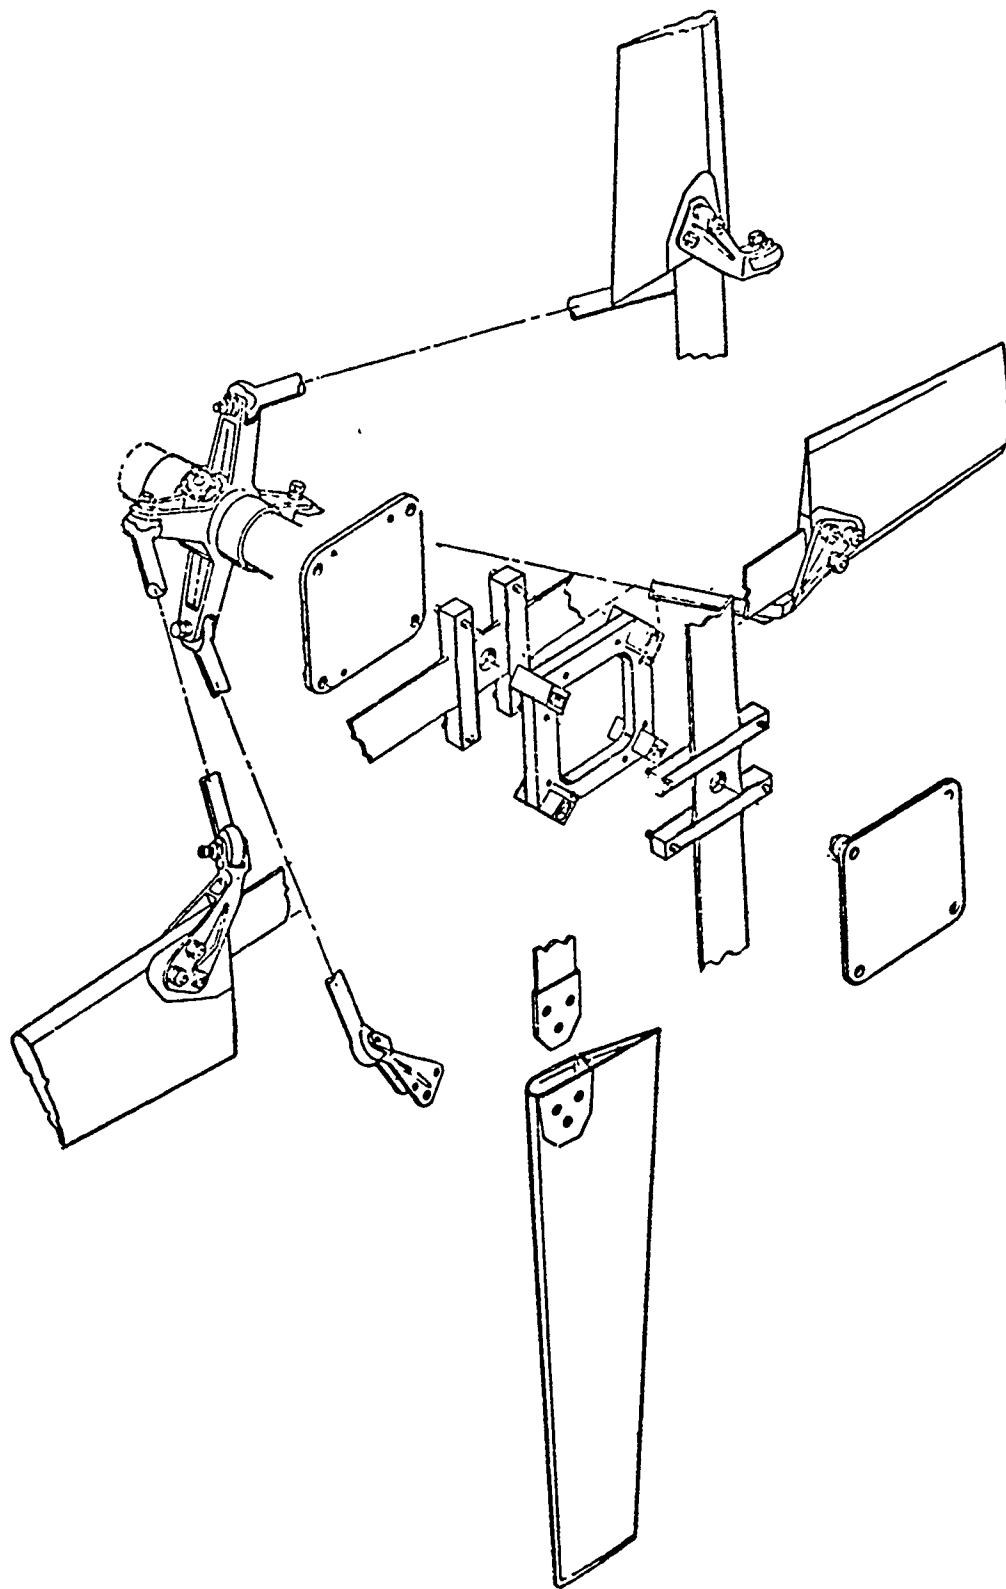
FLEX-STRAP TAIL ROTOR ASSEMBLY
